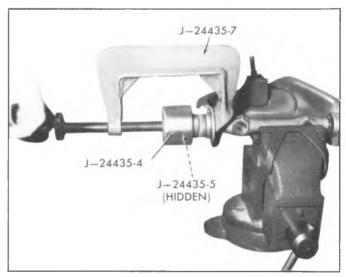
C-23 - U.C.A. Rubber Bushing Installation
